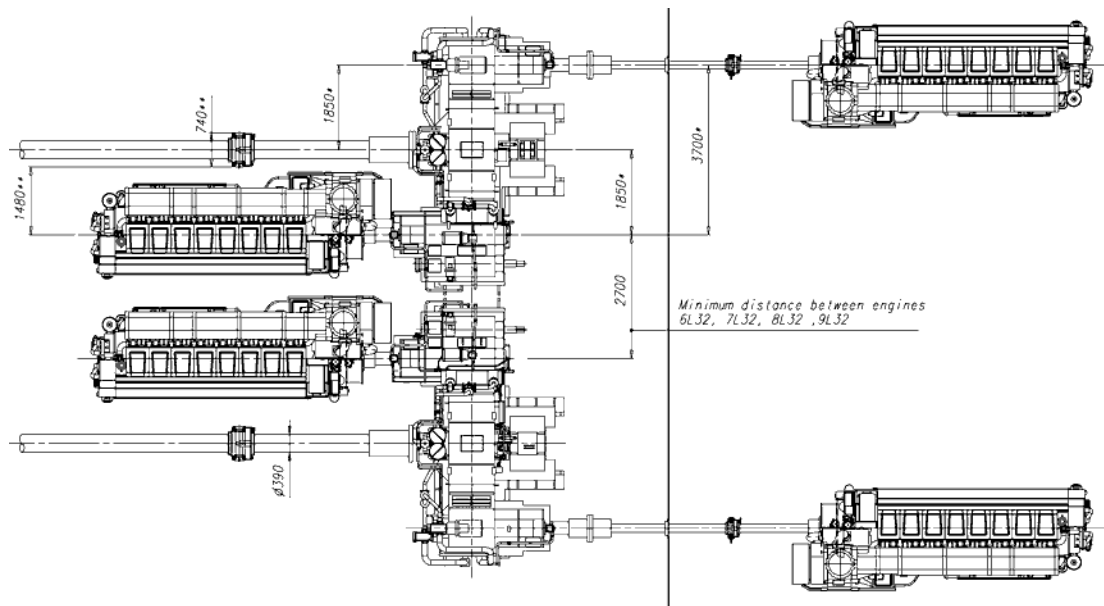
Main engine arrangement, in-line engines (DAAE059178)
